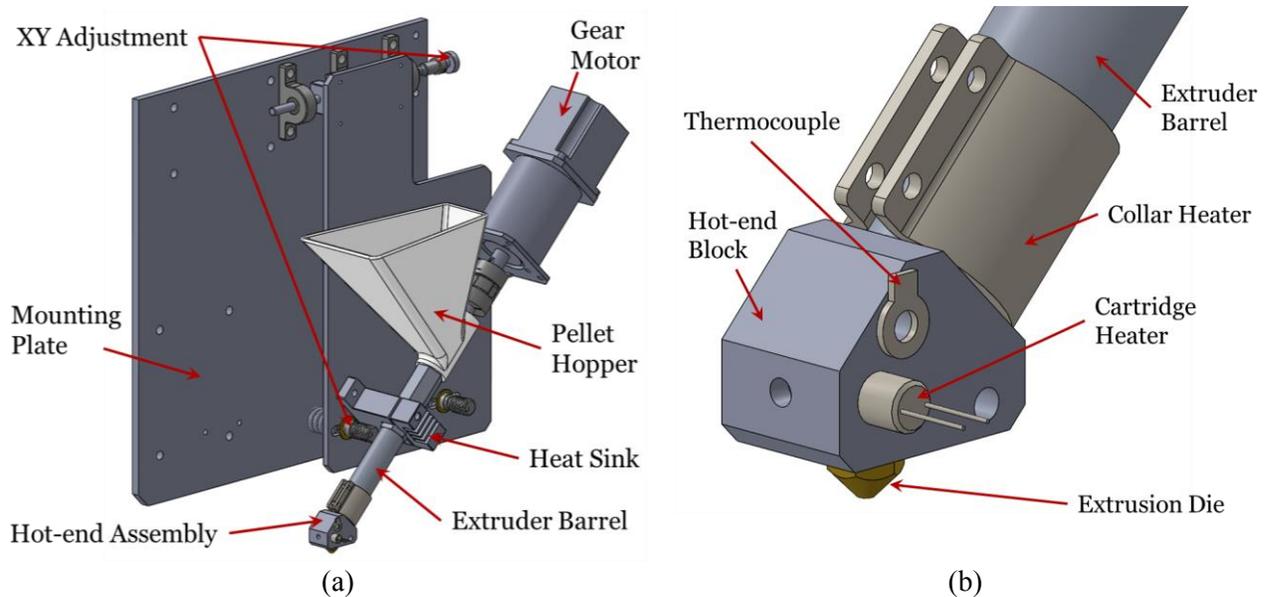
CAD representation of the mini-extruder with mounting and adjustment system for integration in the FEAM system (a); detail of the hot-end assembly (b).
